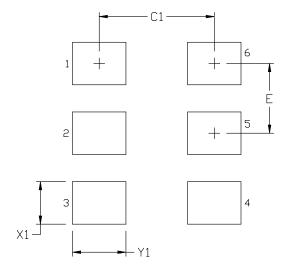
Si565 (5×7 mm) PCB Land Pattern
